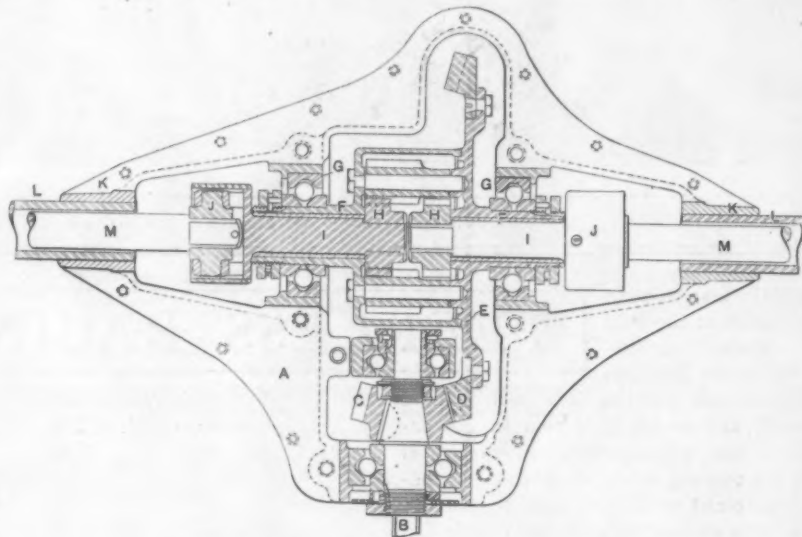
DRIVING GEAR AND DIFFERENTIAL.
